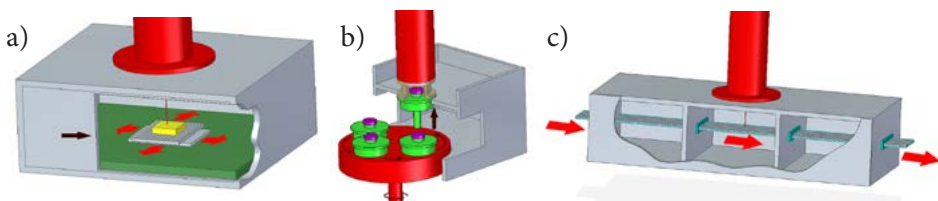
Types of electron beam welding machines due to working chamber design a) universal welding machine with a big volume chamber, b) stroke welding machine, c) continuous operation welding machine (lock) [6]
